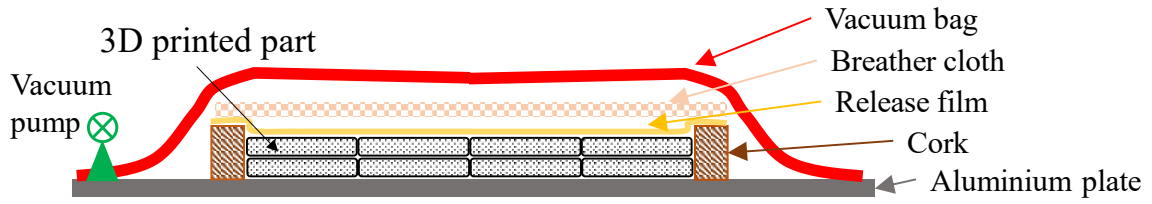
Schematic of open moulding for post-printing consolidation of the 3D printed part used in this thesis.
